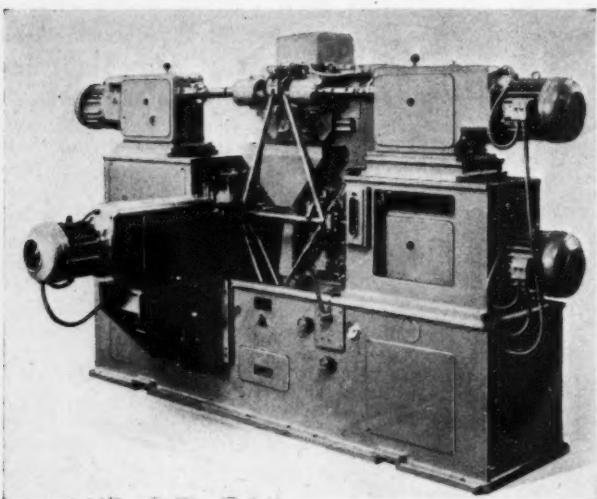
Unit-head Machine for Performing Boring and Facing Operations on Bicycle Frames
